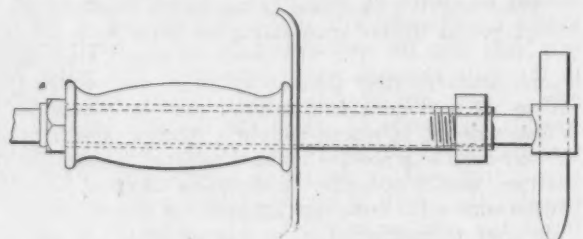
Detail of the Benardos Electrode for Arc Welding.
